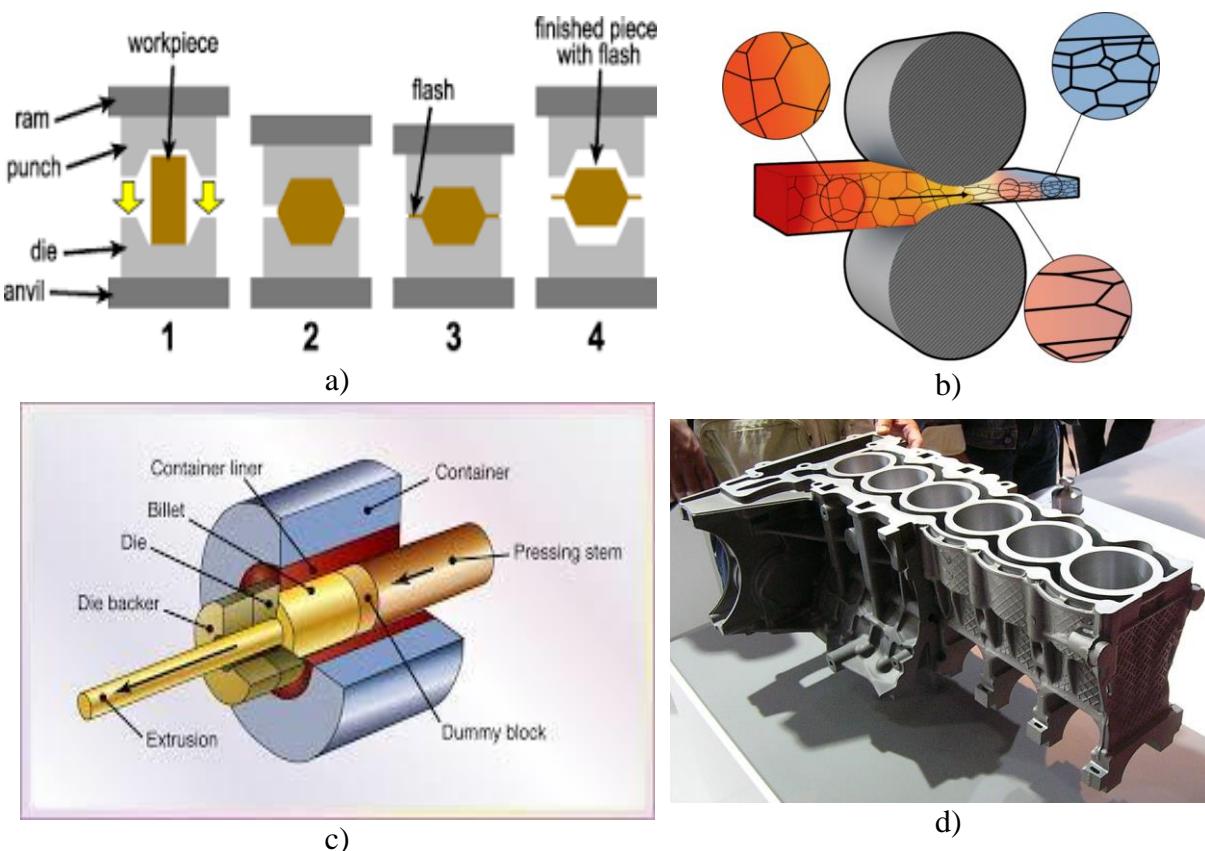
Main hot working processes in metal fabrication: a) forging, b) rolling, c) extrusion and d) specific castings obtained by die-casting
